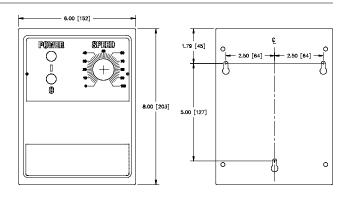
170-103-0010 and 170-103-0002 Dimensions
